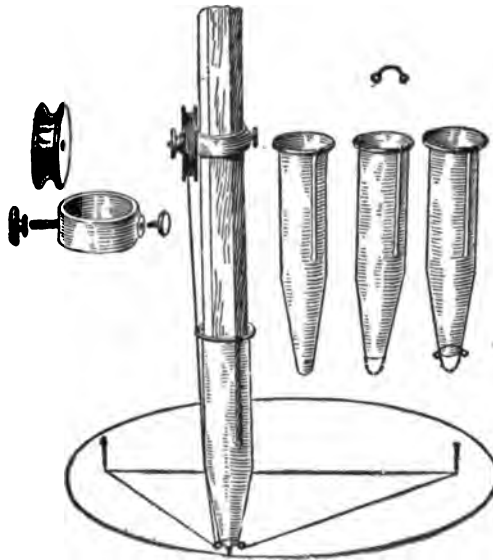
COMPONENT PARTS AND ASSEMBLED ELLIPSOGRAPH
